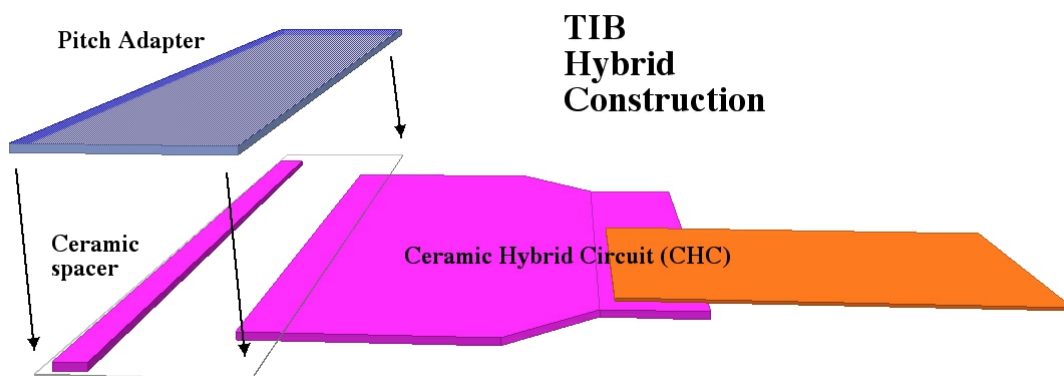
Exploded view of the components which comprise a TIB hybrid.
